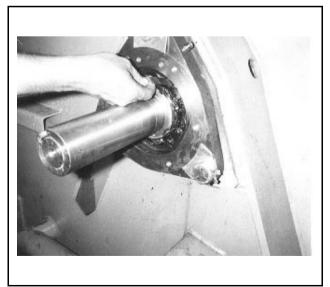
(MSSM0303AE) Measuring the Mounted Internal Clearance of the Bearing (42" machine shown)
